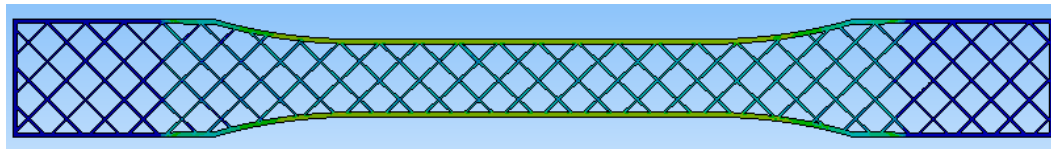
Cross-sectional view of the 20% infill tensile test specimen
